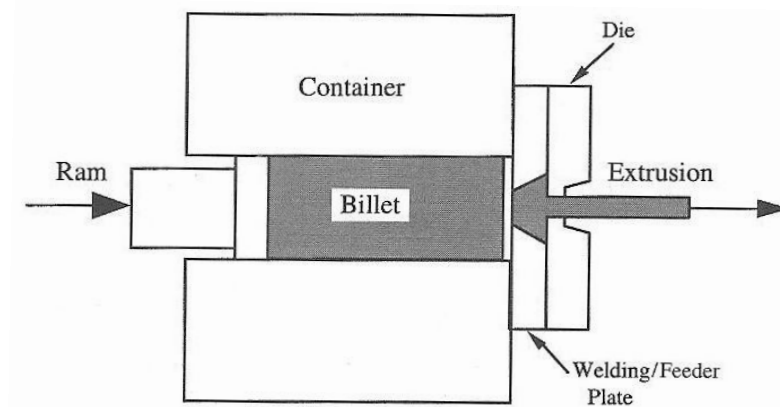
Billet-on-billet extrusion using welding plate in front of the die [22].
